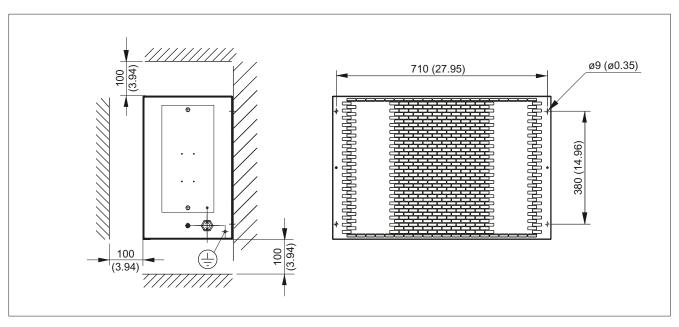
Installation drawing (wall mounting) of braking resistor 6SE7028-0ES87-2DC0 where P_n/P_{max} = 12.5 kW/75 kW, all dimensions in mm and (inches)
